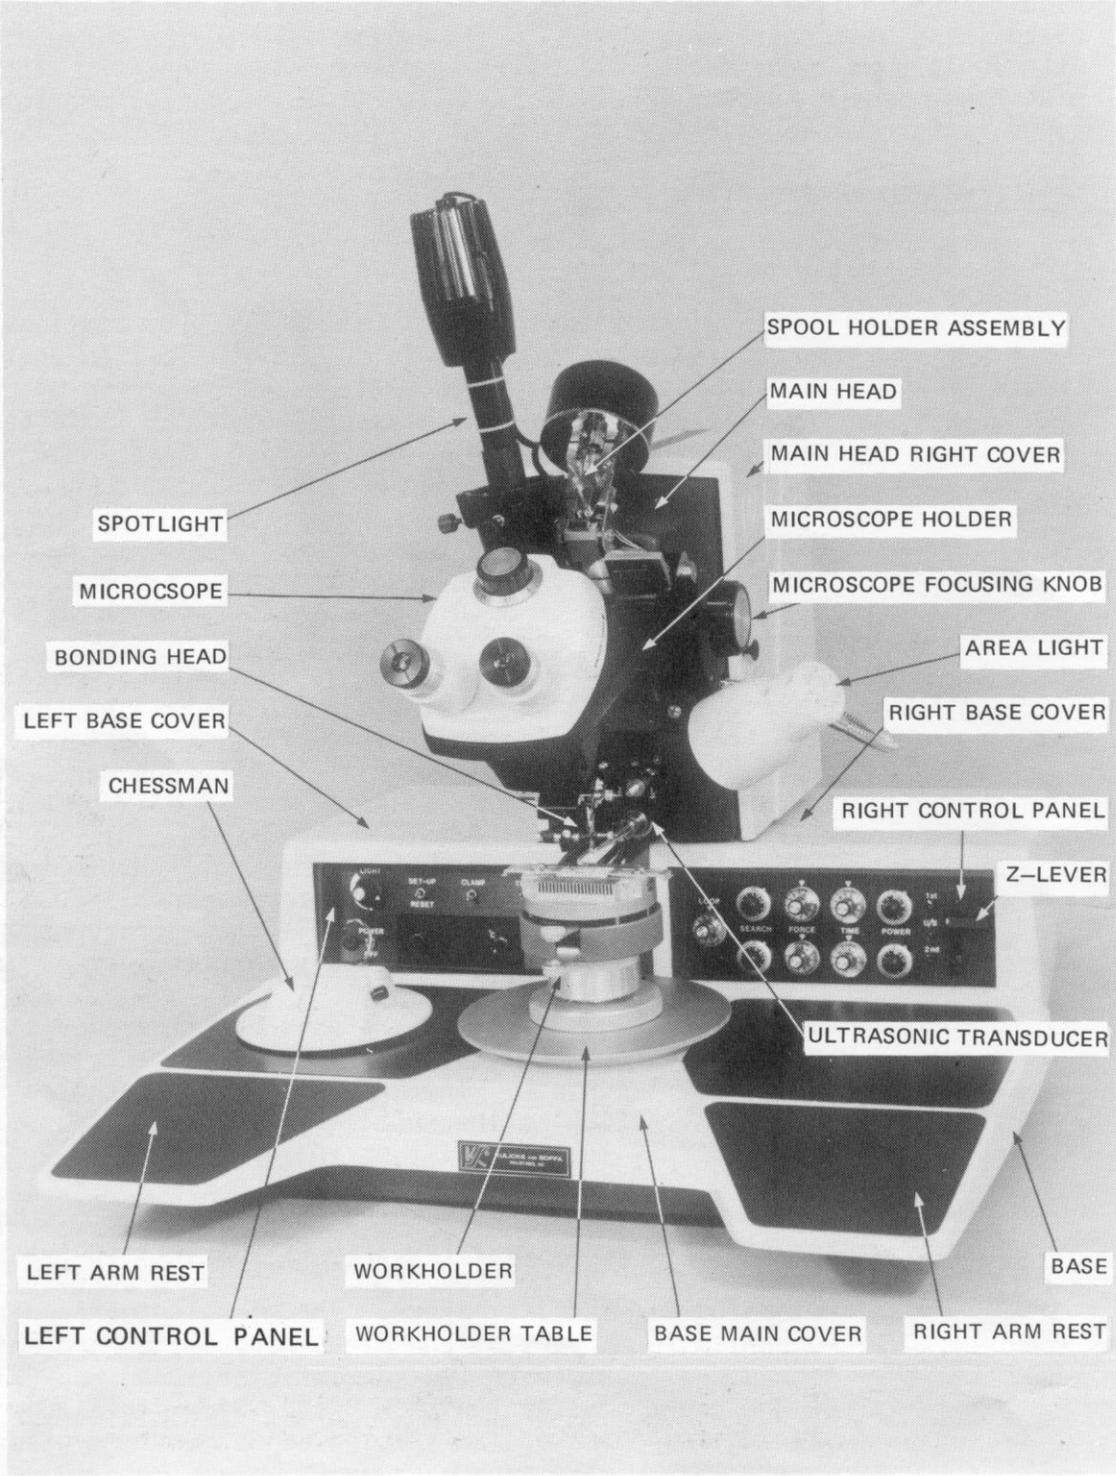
MODEL 4124 BALL BONDER – MAIN PARTS
